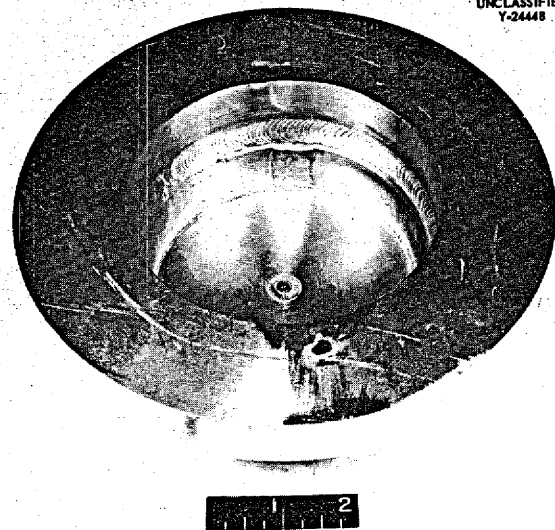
Bottom View of Completed Pump Fabrication Test Assembly.
